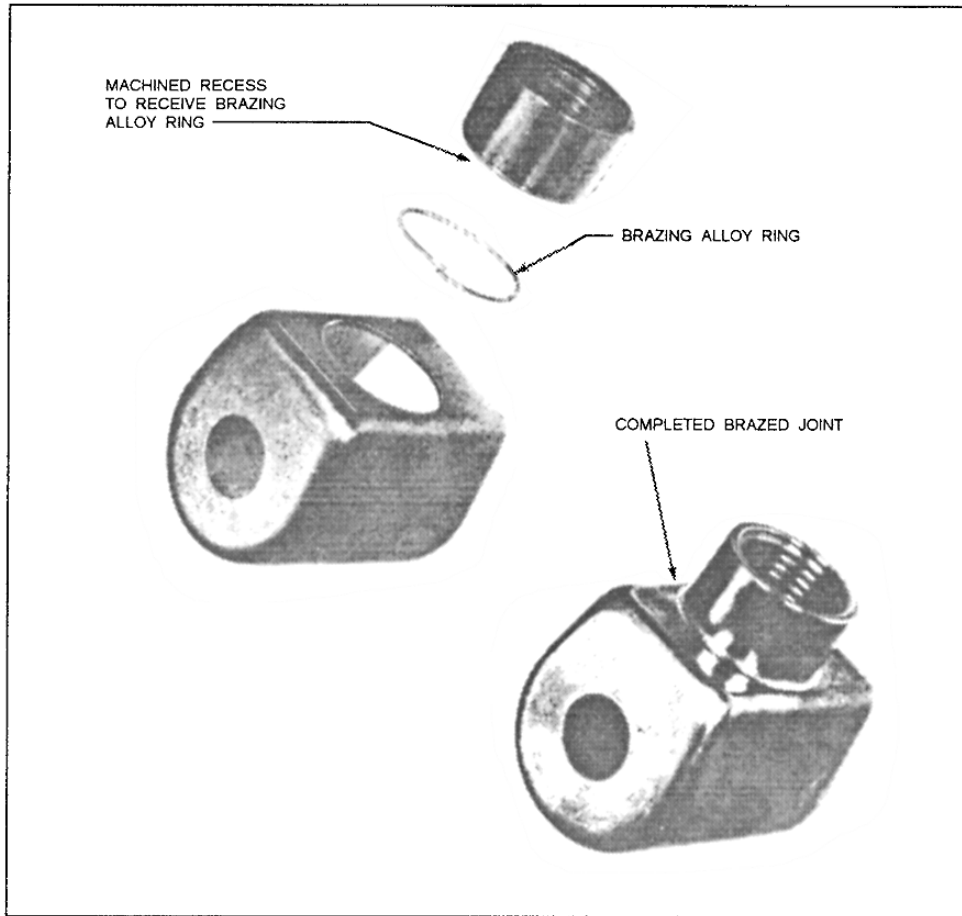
Silver-brazed joints designed to use preplaced silver alloy rings. The alloy forms almost perfect fillets, and no further finishing is necessary.
